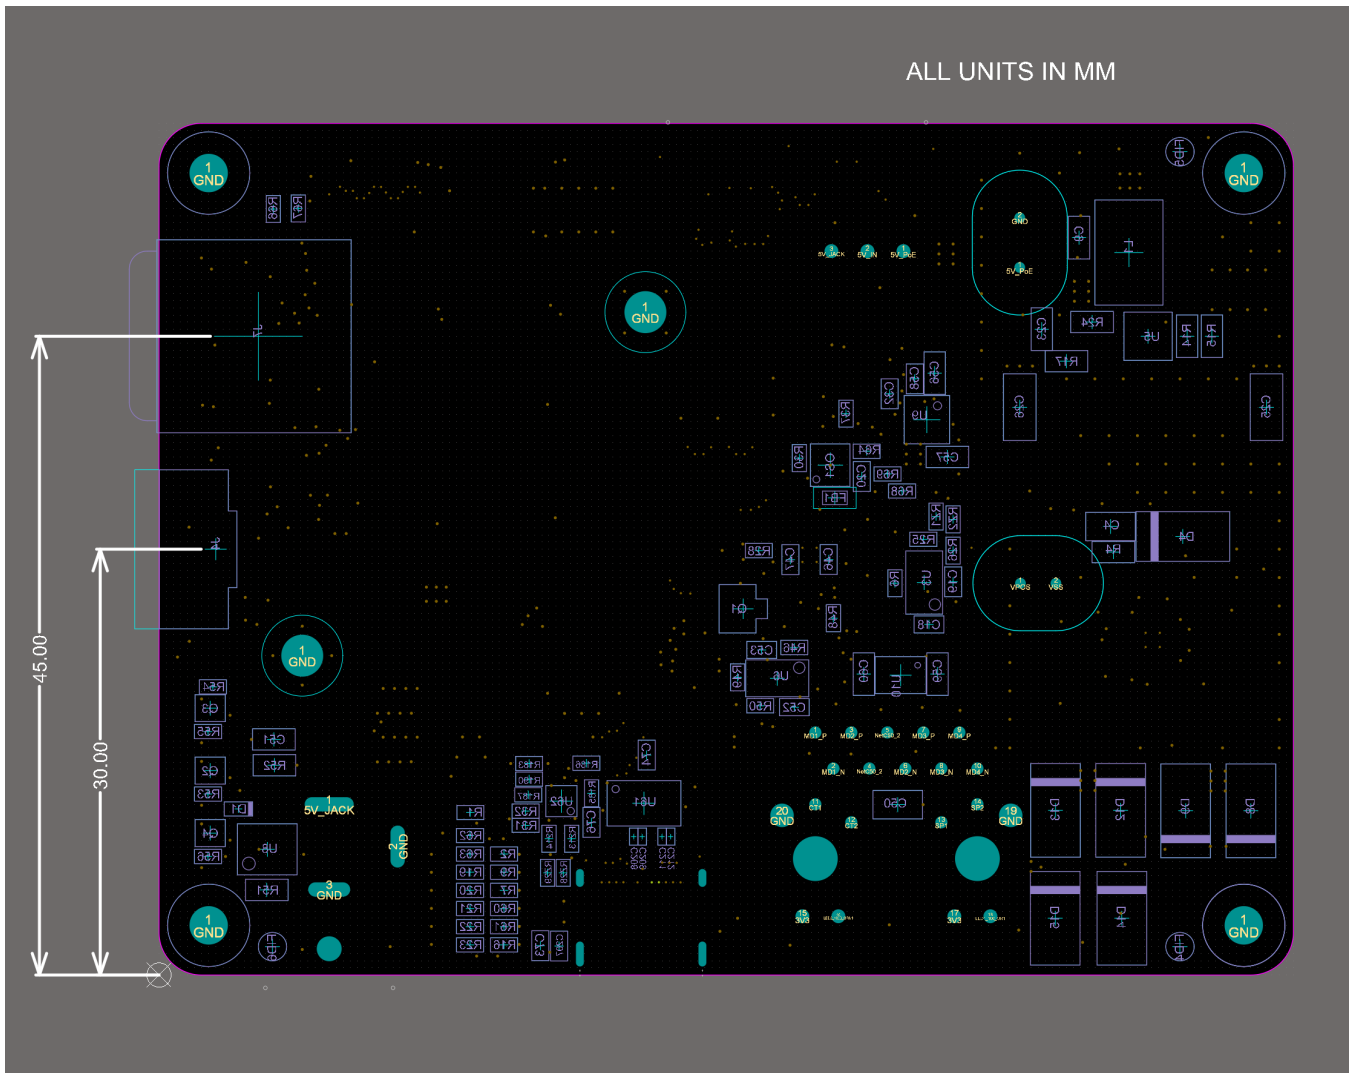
BW2098POE_ROM0E0 Bottom View Dimensions
